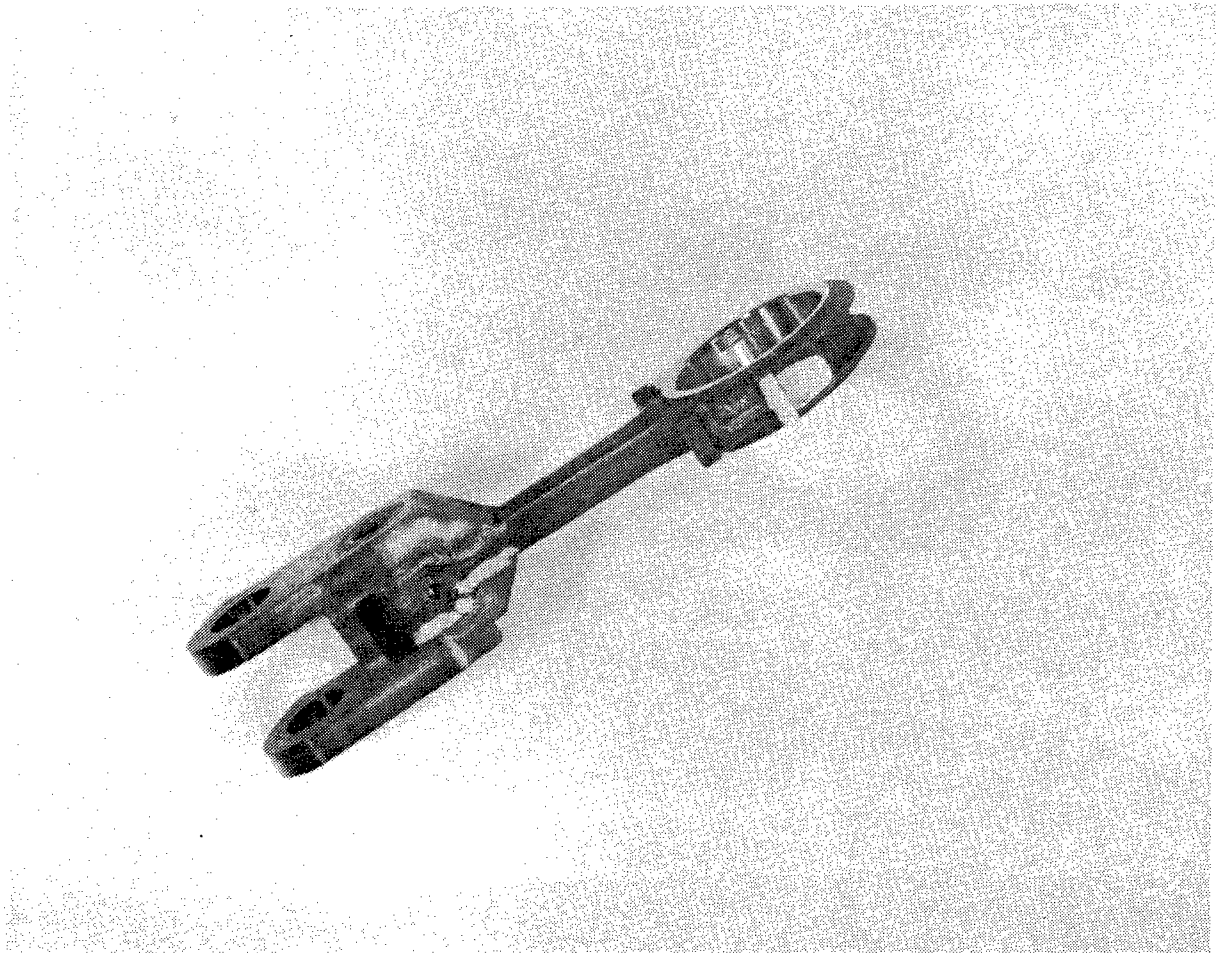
Double Clevis Steel Connecting Rod (B/N-04)
